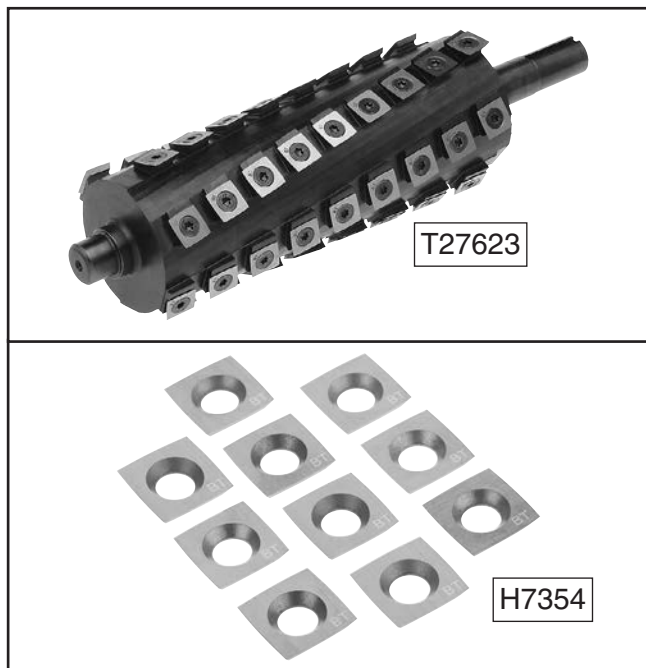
Shelix 8" cutterhead and indexable carbide inserts.
